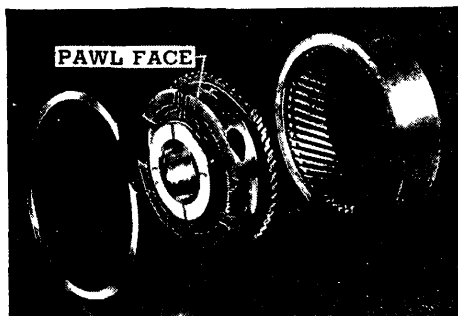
Centrifugal clutch should be installed with out end play. Installing a thick r snap ring reduces play
